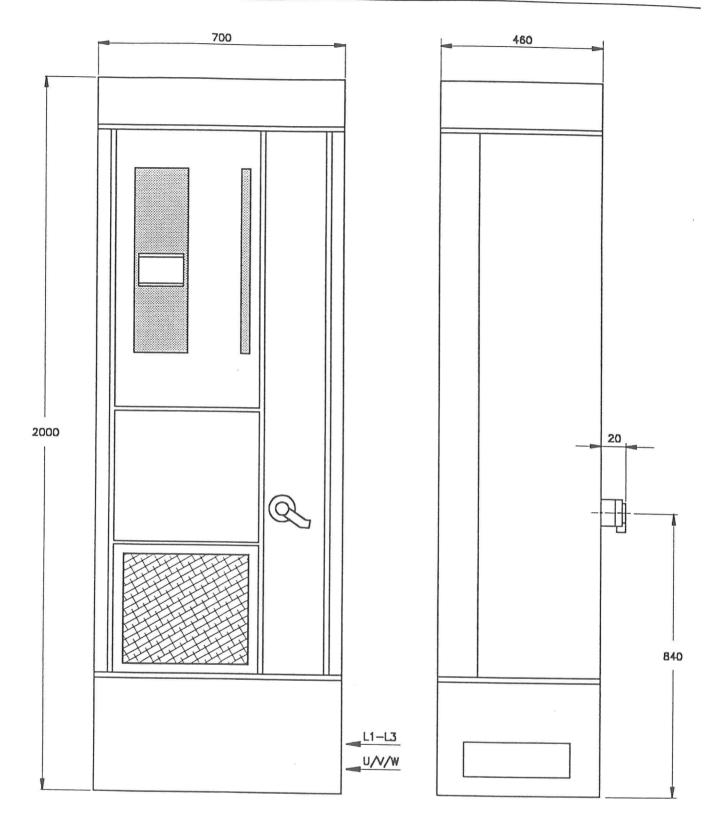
Dimensions of the floor mounted cabinet IP21 type V\*I 082 and 111
